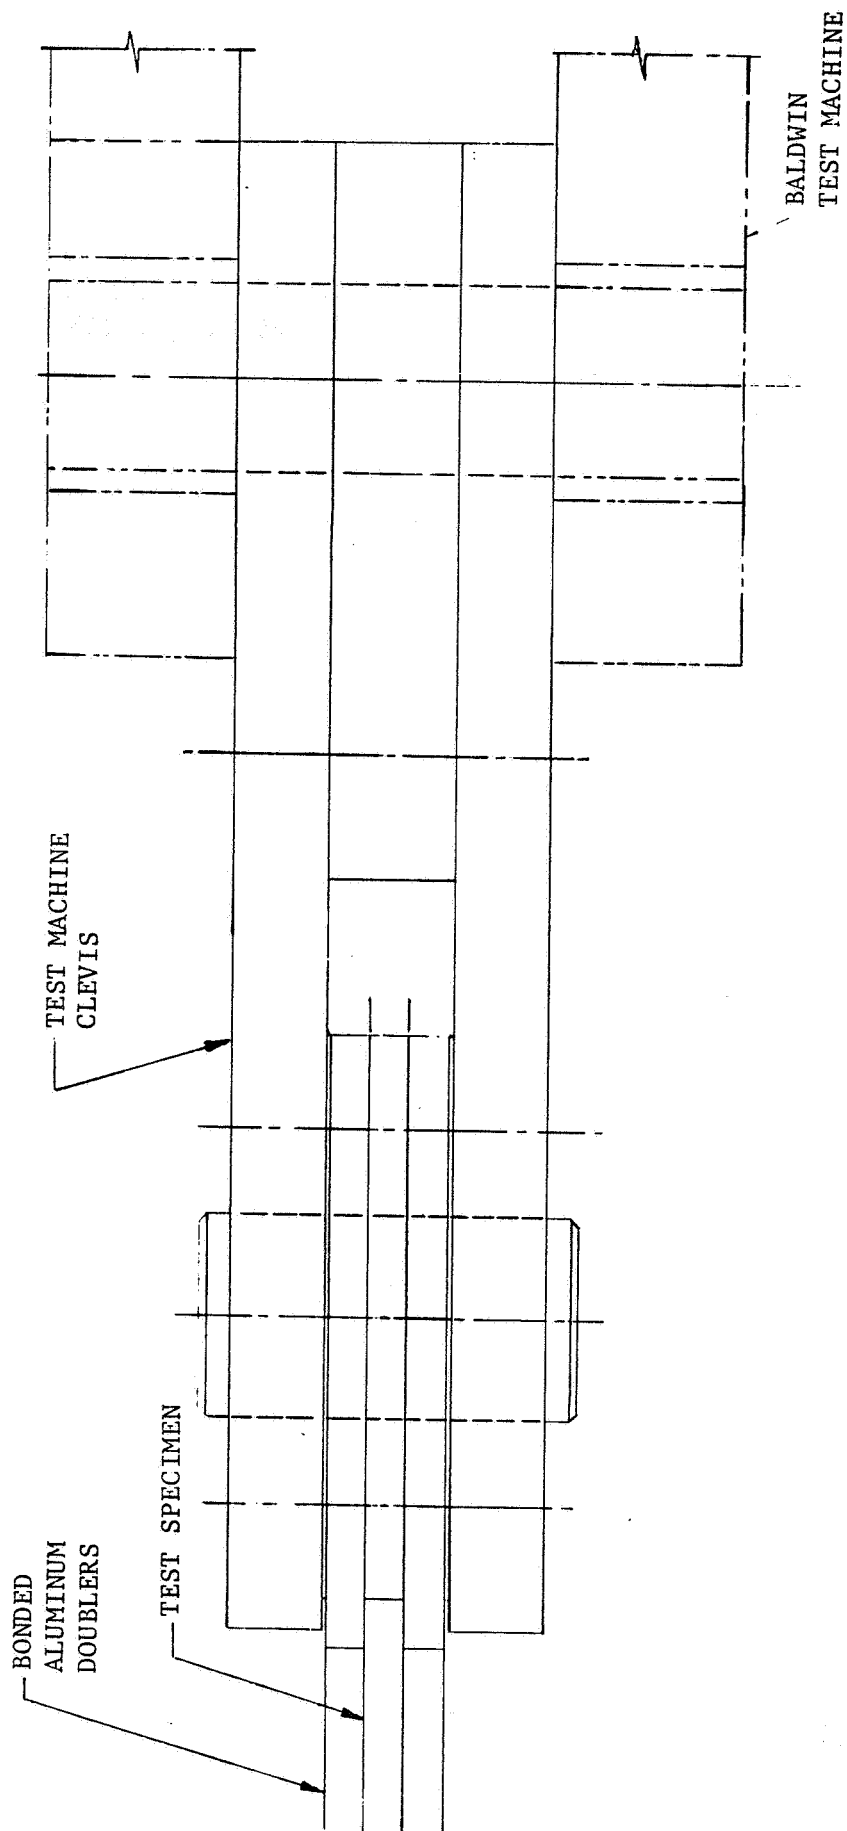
STRINGER JOINT END FITTING - SIDE VIEW
